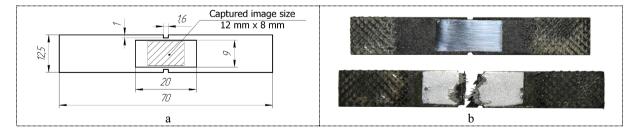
a) Drawing of the specimen with glued sensor;b) Images of untested and fractured specimens.
